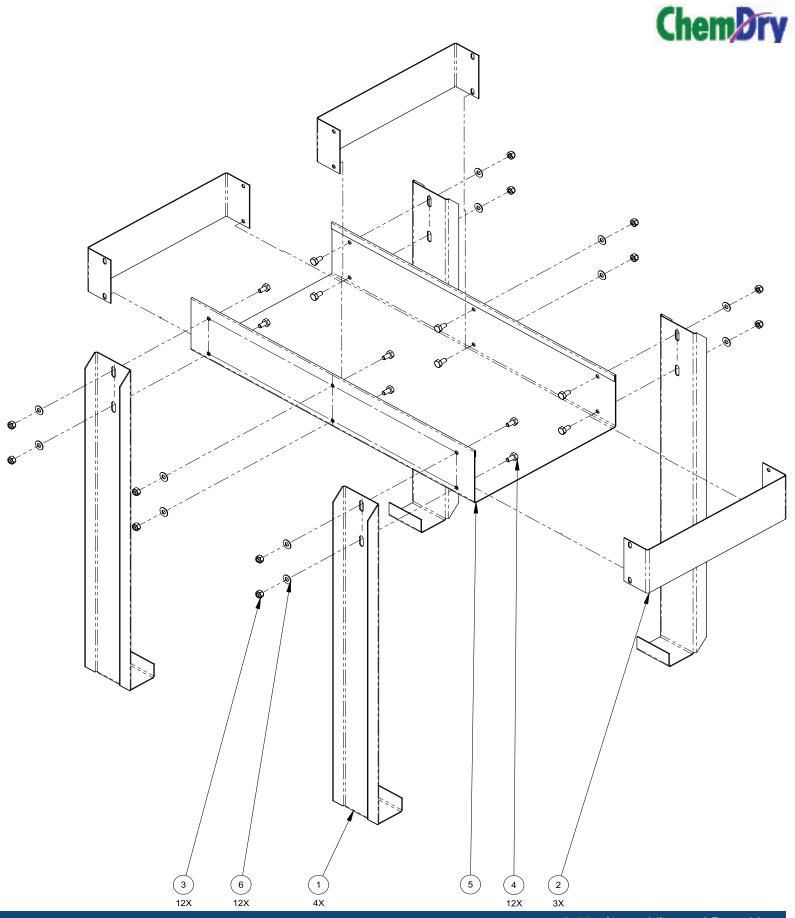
35 Gallon Tank Flex Chemical Caddy Assembly 000-163-757 Rev. B
